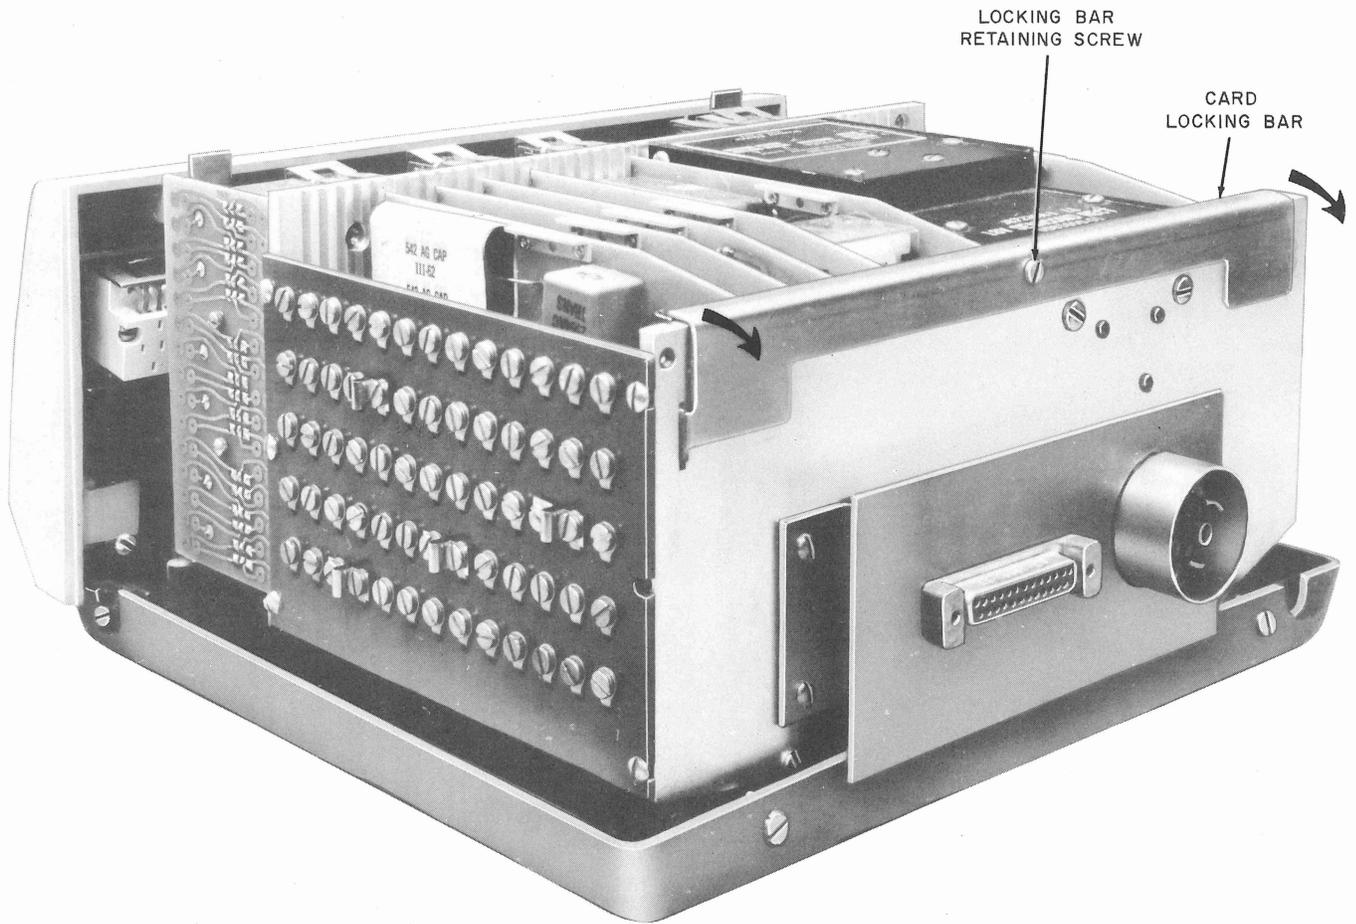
Data Auxiliary Set 801C Type — Covers Removed for Printed Circuit Board Replacement
